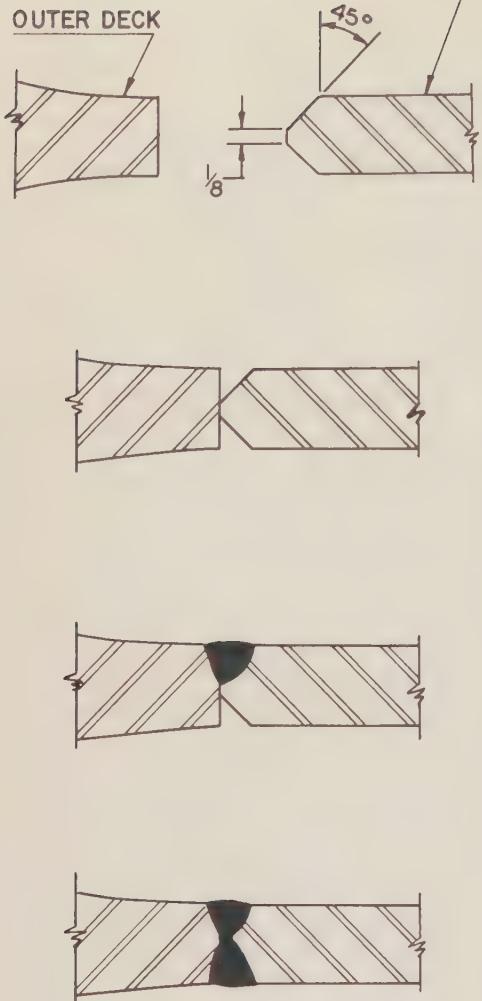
The outer deck and stress member sub-assemblies are machined for welding, as shown. The matching faces are brought together and tack-welded. The top and bottom channels are then arc-welded.
